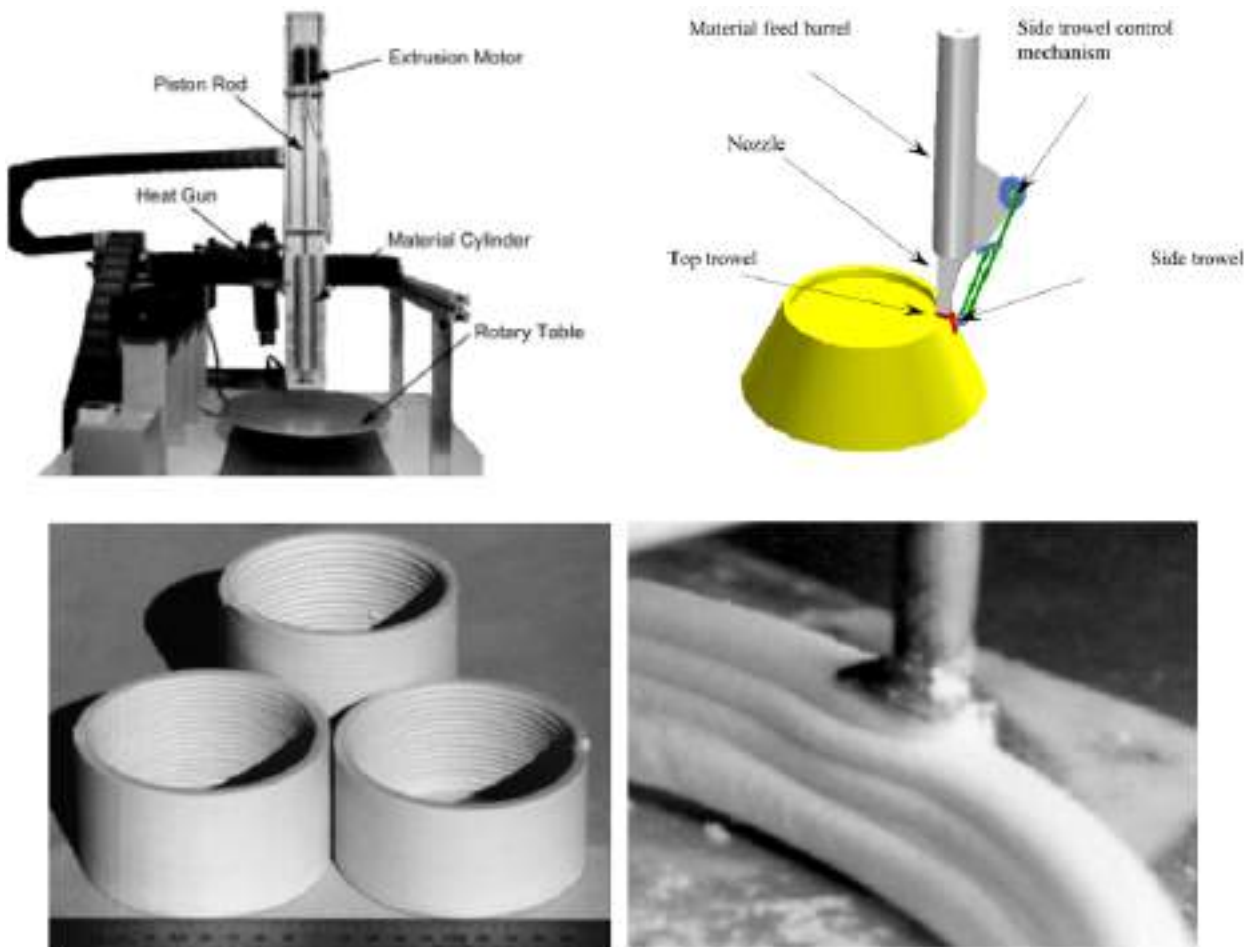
The Contour Crafting machine and 3D printed clay parts, after [10].
